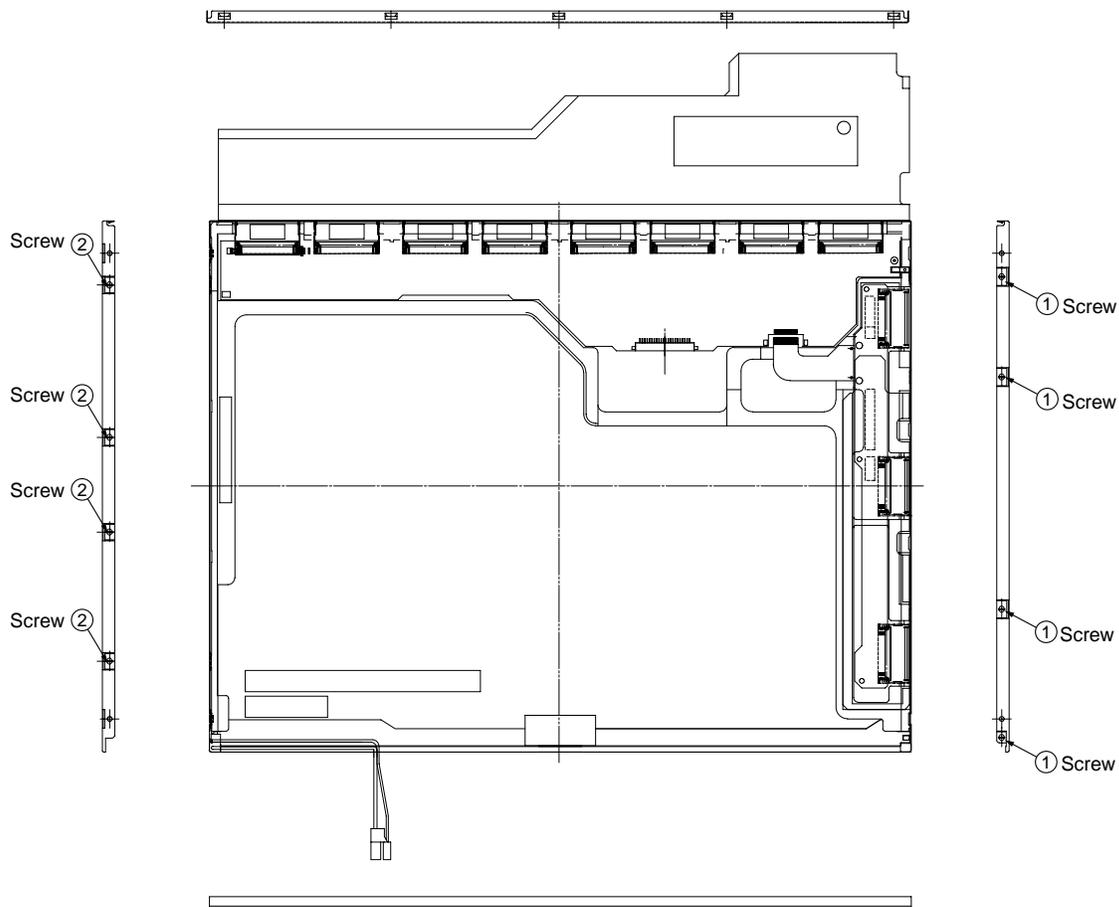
Folding out the insulation sheets and removing the screws and FPC
